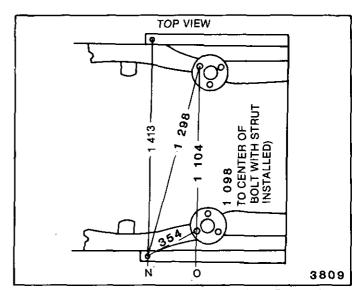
Rear Compartment Upper Side Rail and Suspension Strut Tower Dimensions
